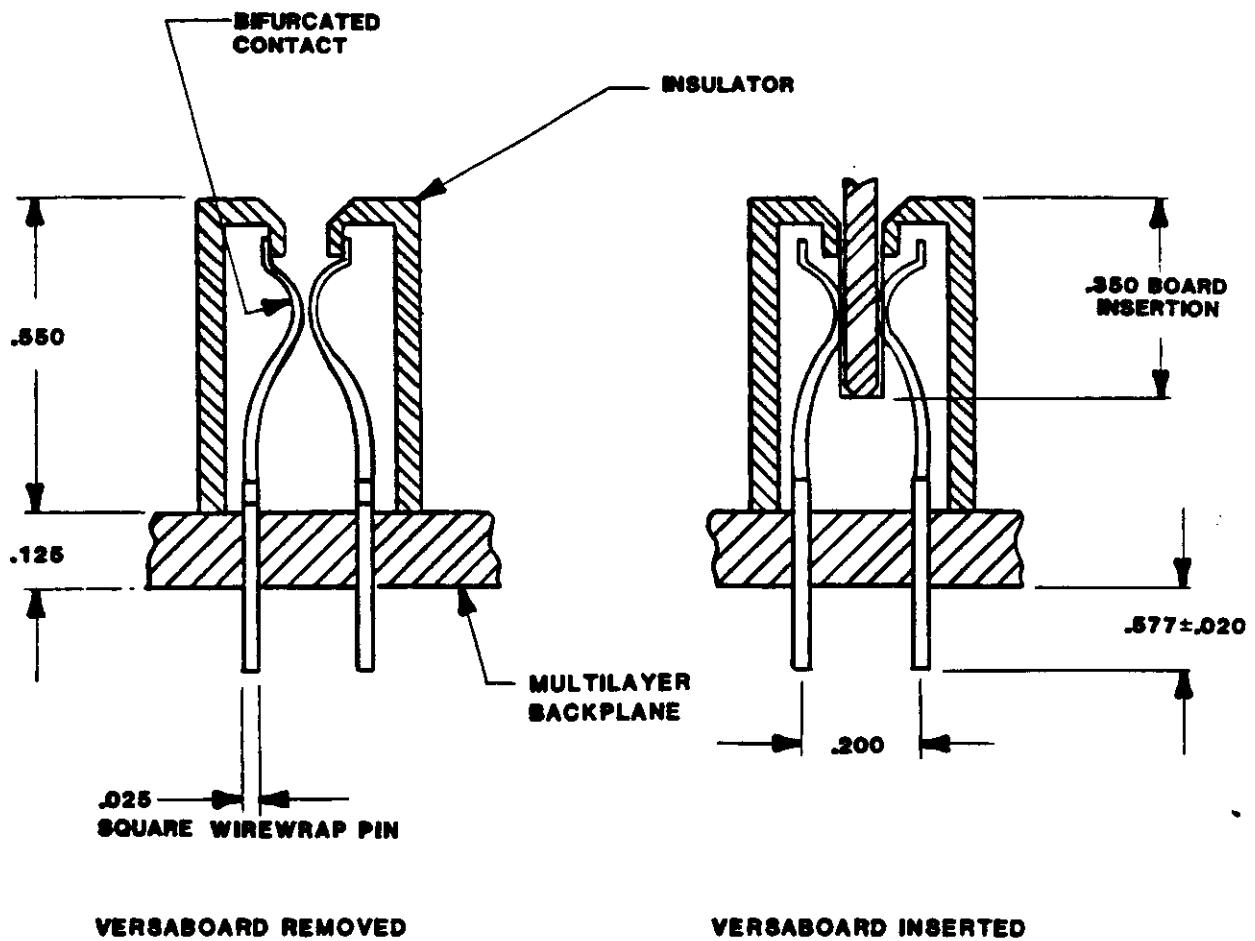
Backplane/VERSABOARD Dimensional Requirements
